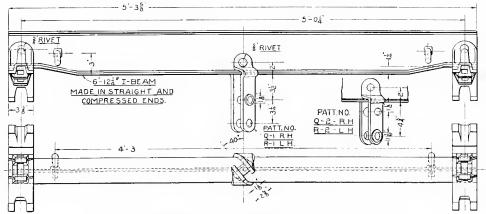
Monarch Solid Compressed End Brake Beam.
